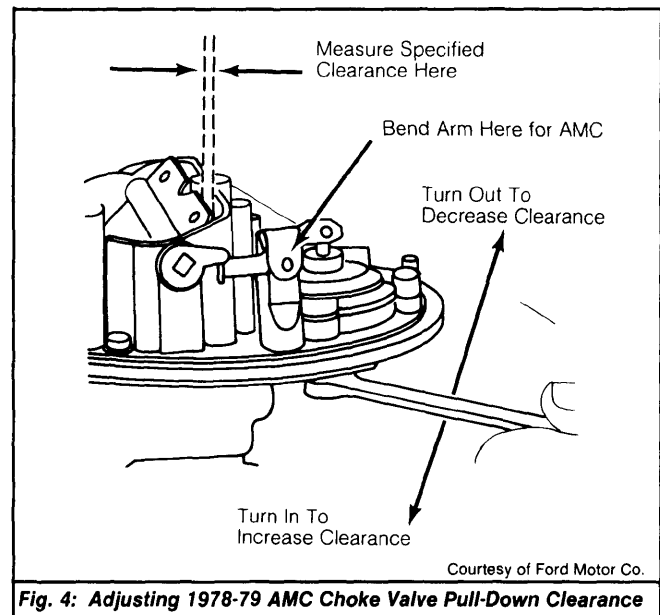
Adjusting 1978-79 AMC Choke Valve Pull-Down Clearance
